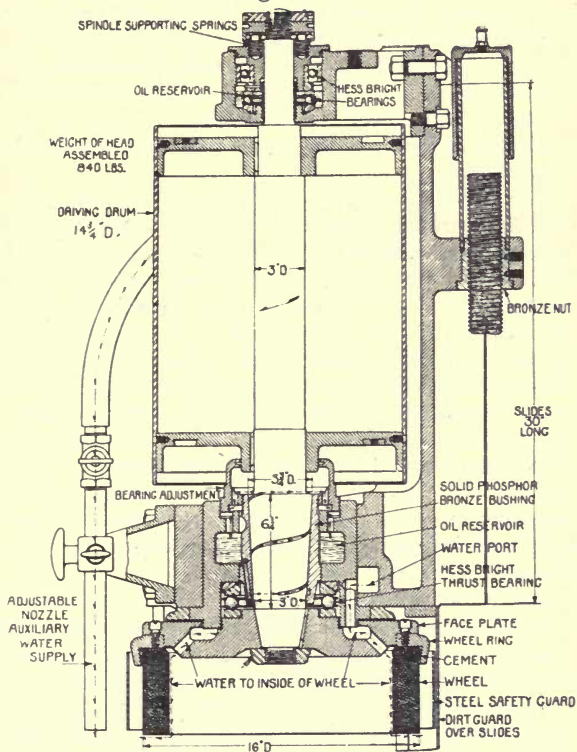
WHEEL HEAD OF BLANCHARD VERTICAL-SPINDLE SURFACE GRINDER
